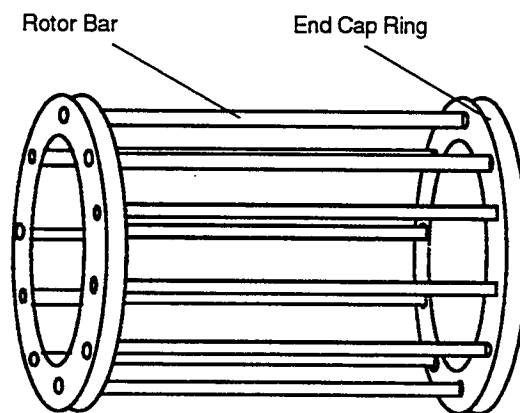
Squirrel Cage Rotor of an Induction Machine.
